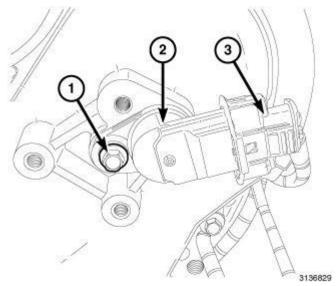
Camshaft Position Sensor, Connector & Bolt Courtesy of CHRYSLER GROUP, LLC
